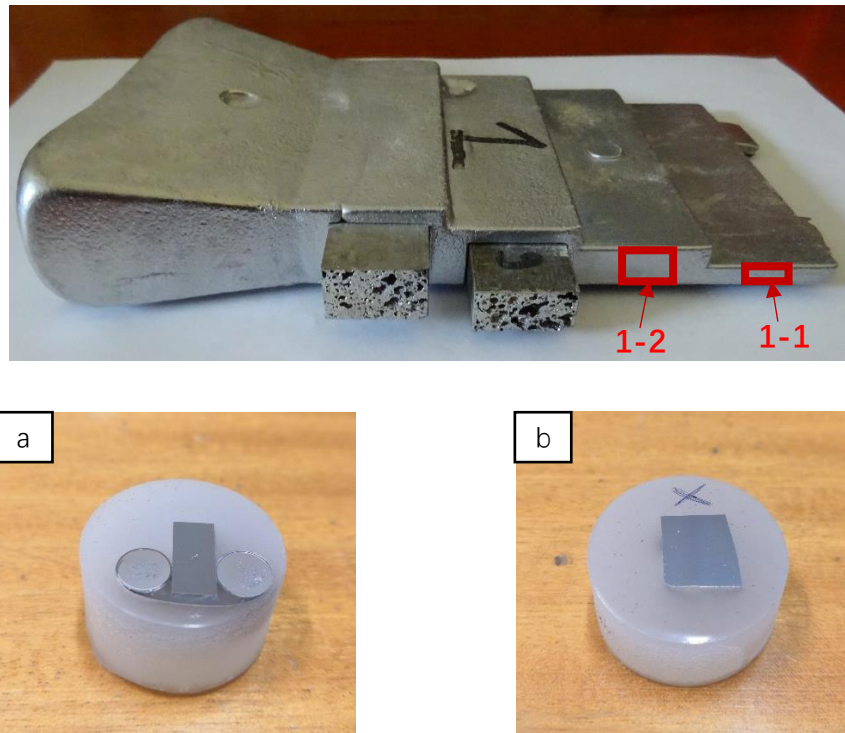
Macroscopic appearance: (a) Sample 1-1; (b) Sample 1-2
